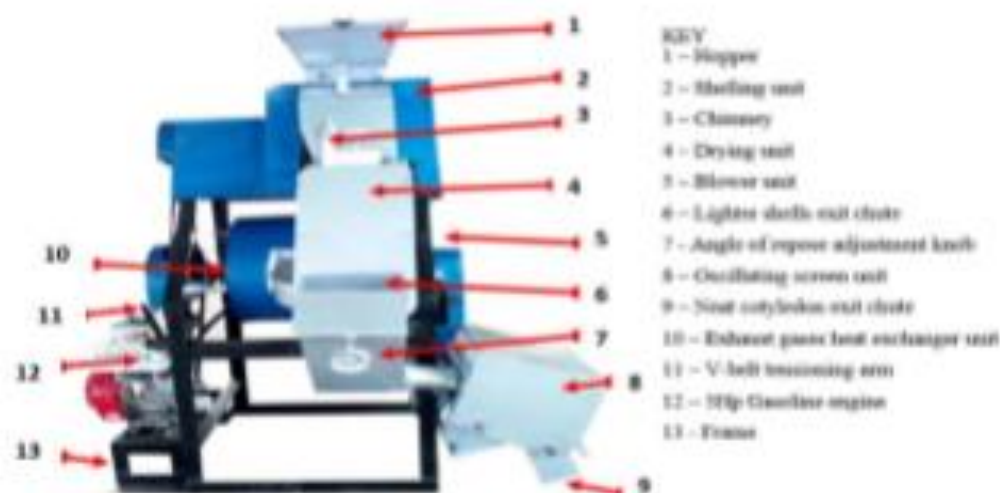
A Labelled Picture of Melon Seeds Shelling and Separation Machine
